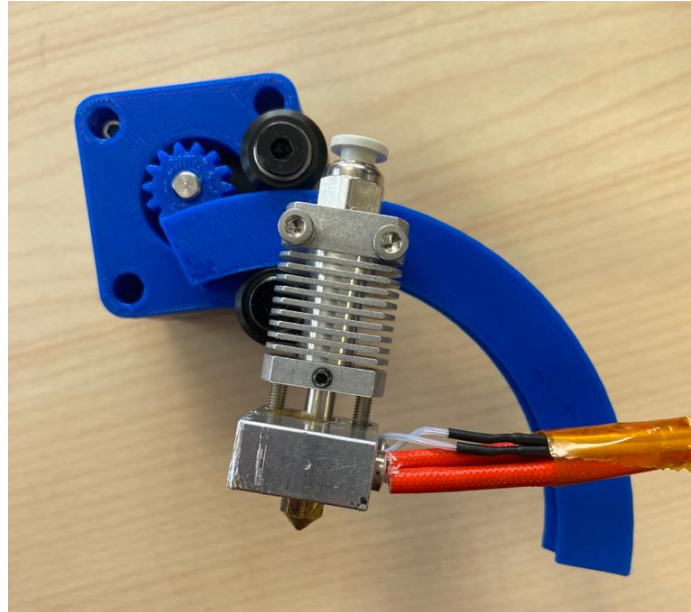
Prototype B-axis assembly of VP2 prototype, showing the carrier gear which was too compliant
